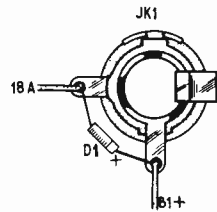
Detail of the bell jack socket (JK1) showing the mounting of D1
